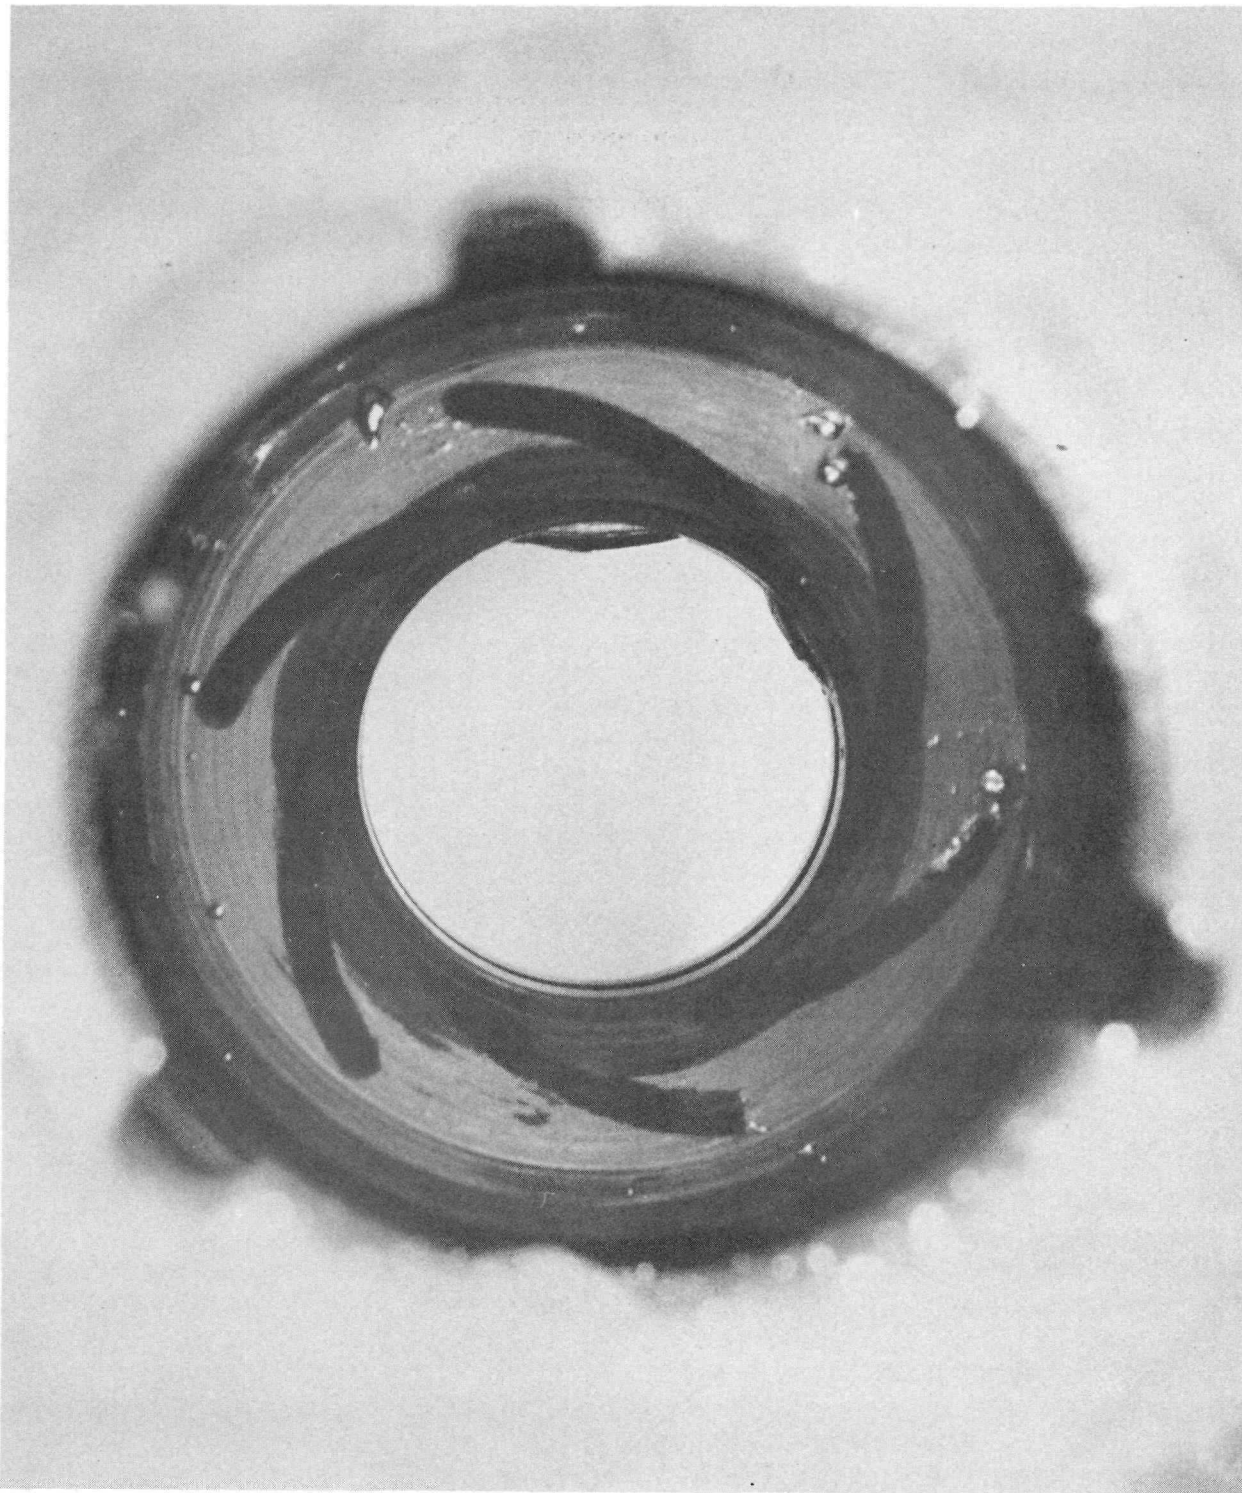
Spiral Groove Thrust Bearing After 875 Hours
